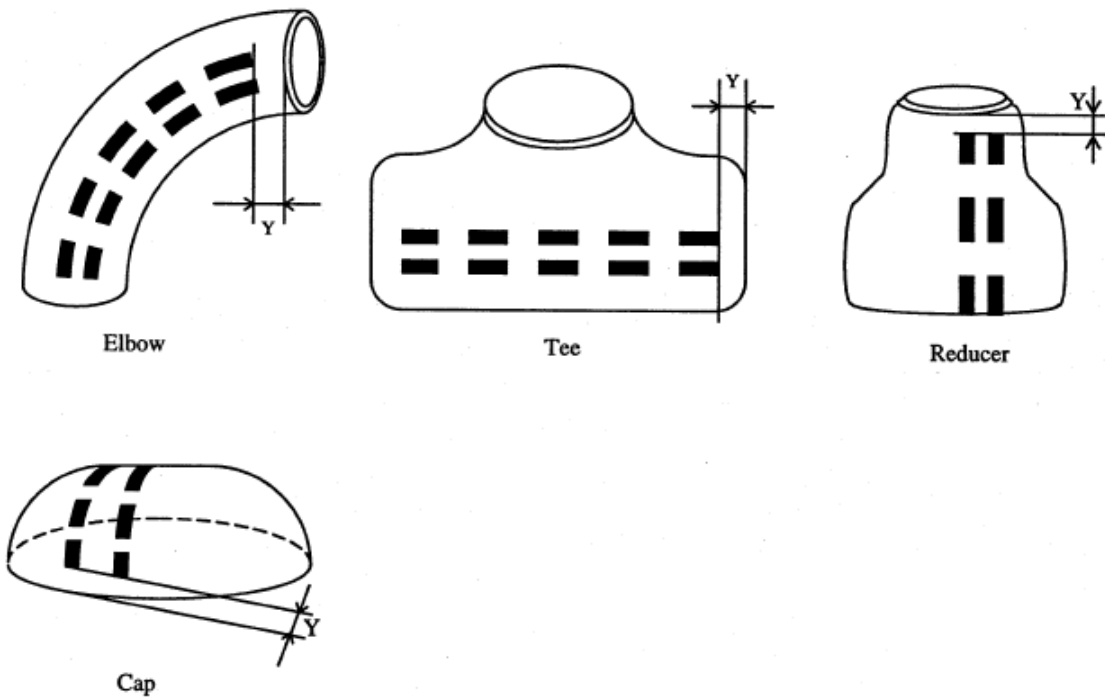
(b) COLOR CODING OF BUTT WELDING FITTINGS AT FIELD (TWO COLOR)
